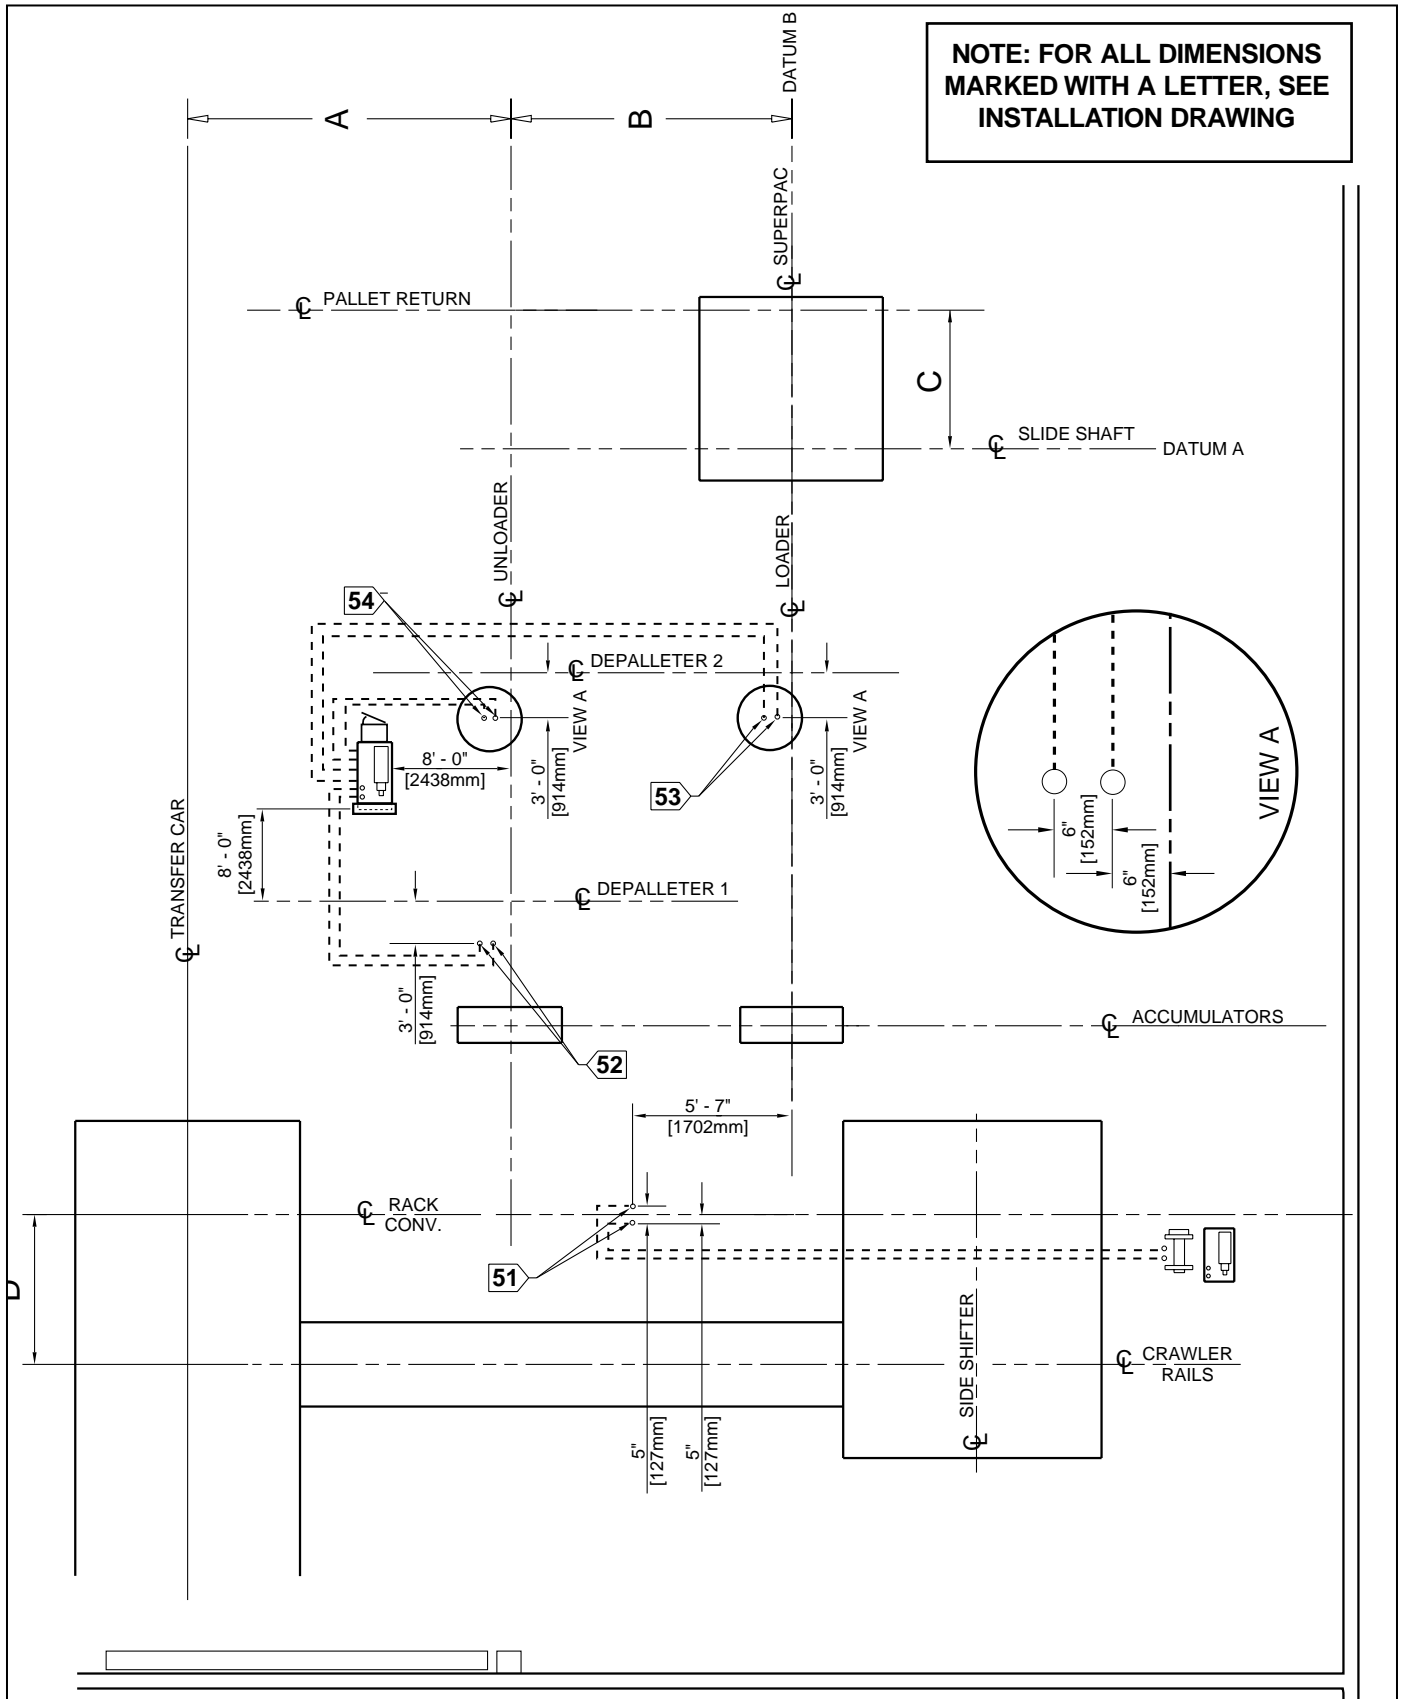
MS-12 BESSER-MATIC HYDRAULIC INSTALLATION (ref. installation print sheet 2).
